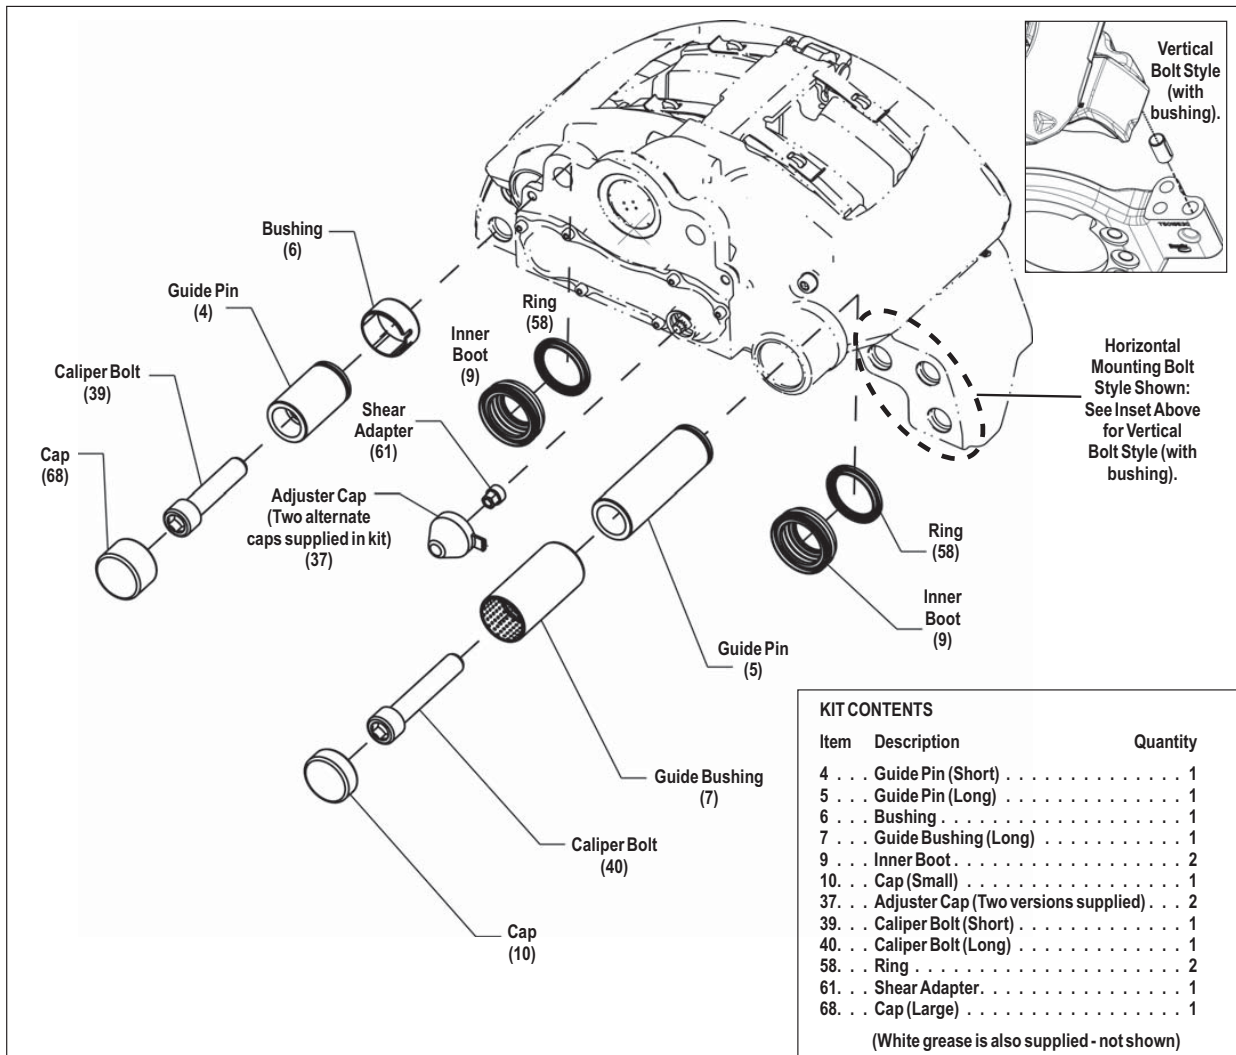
GUIDE PIN EXPLODED VIEW
